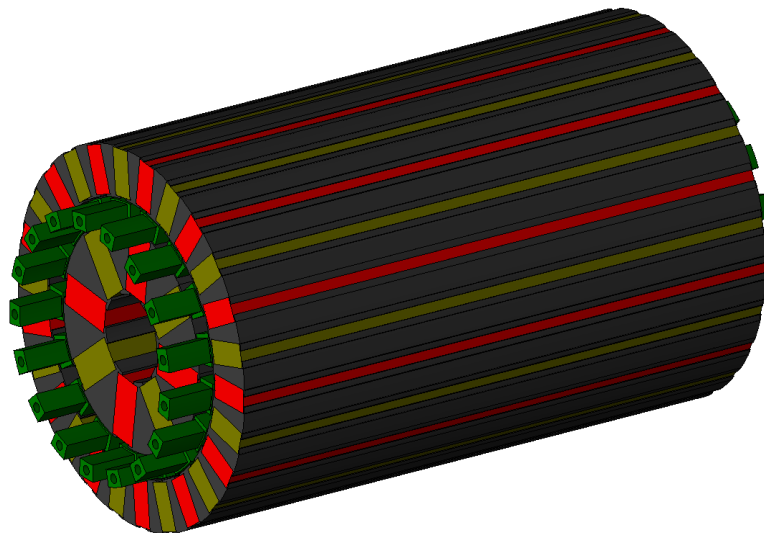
Assembly of MG with Pacific Scientific rotor as inner rotor
